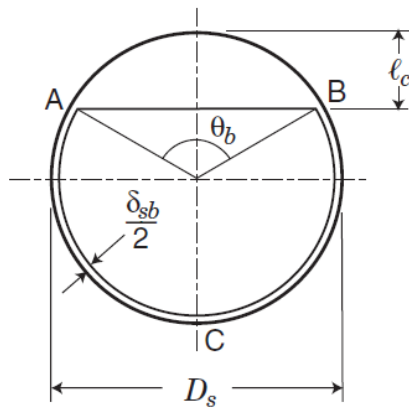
Single segmental baffle geometry showing shell-to-baffle diametral clearance δ_{st}
